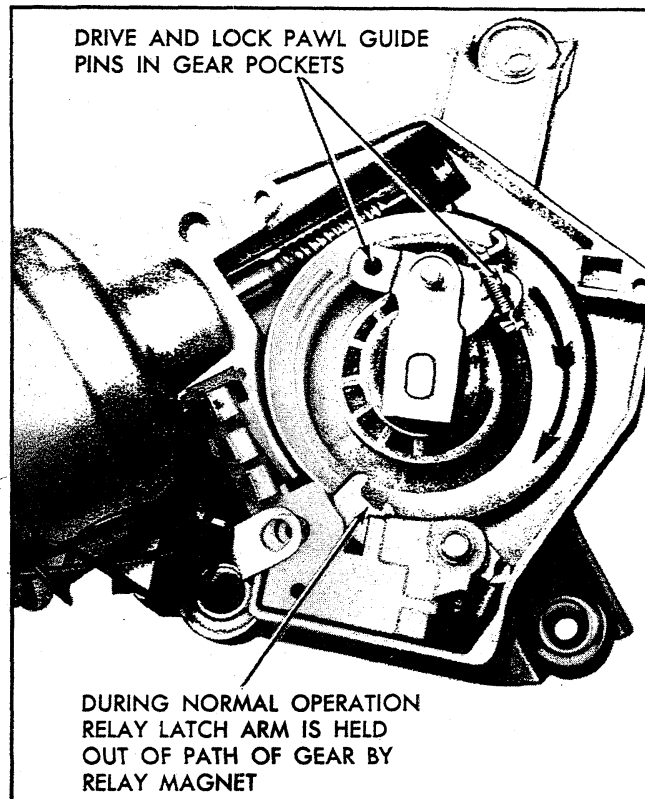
Drive and Lock Pawl Guide Pins in Pockets
